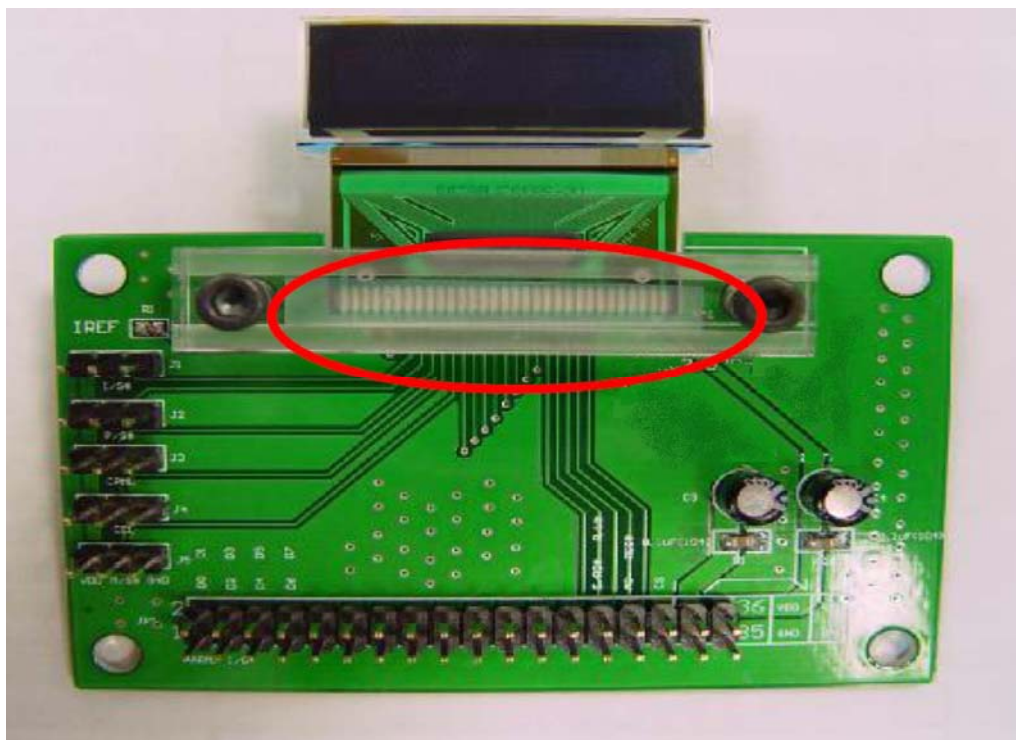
the DD-2832BE-1A and EVK assembled (Top view)
